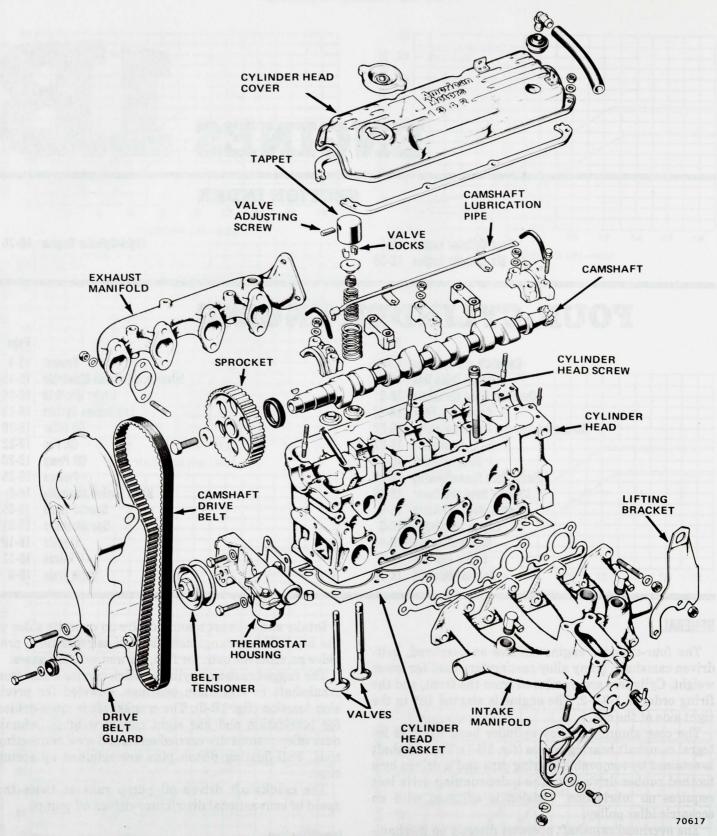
B-1 Four-Cylinder Engine Assembly—Head
